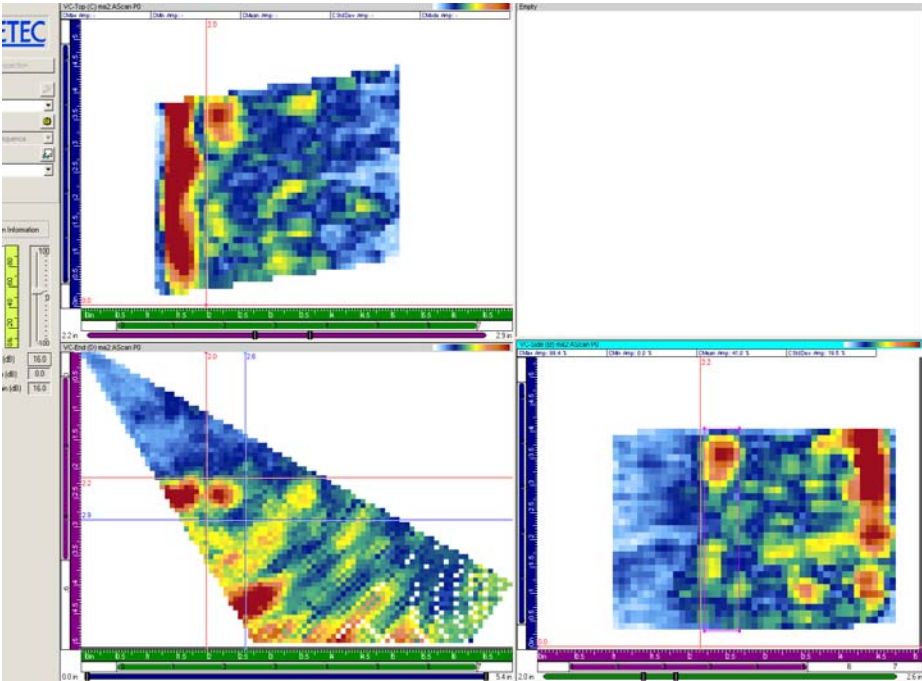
B519 Inspected from the Equiaxed Side of the Weld, Showing a Yes Detected
